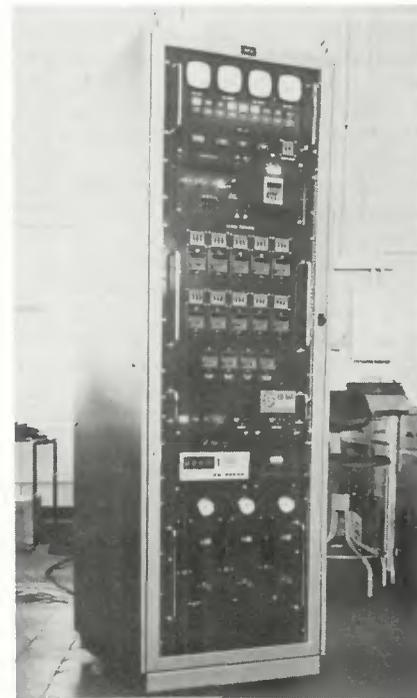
Mk 7 tube/tubesheet weld programmer fitted with pulsing, indexing and monitoring modules (courtesy of Babcock & Wilcox Operations, Ltd)
